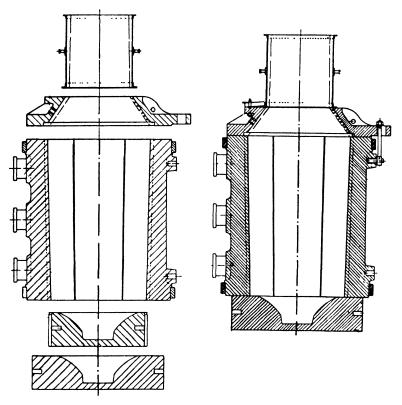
Large ingot moulds—head and chill. (By courtesy of B.I.S.R.A.)
